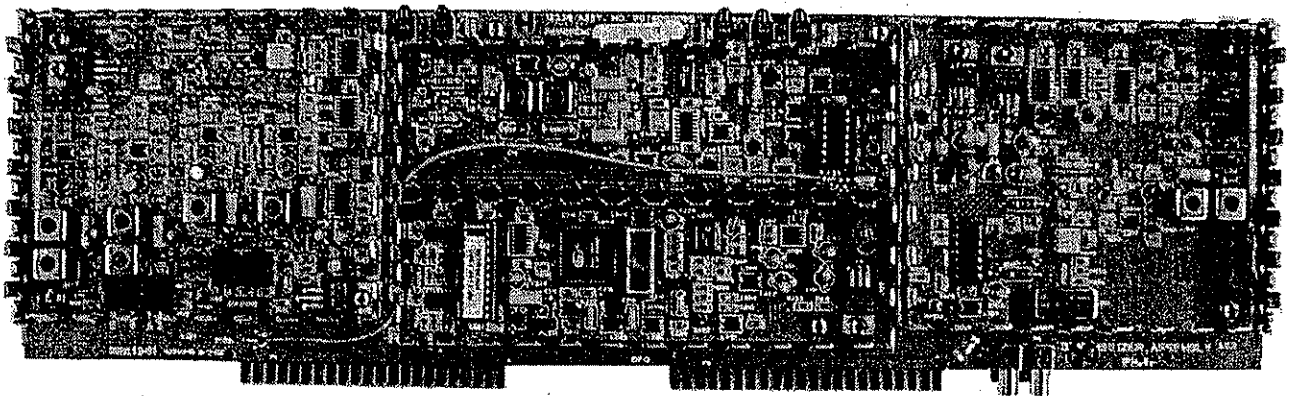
P/N 8076060095 Revision B Synthesizer Printed Circuit Assembly
